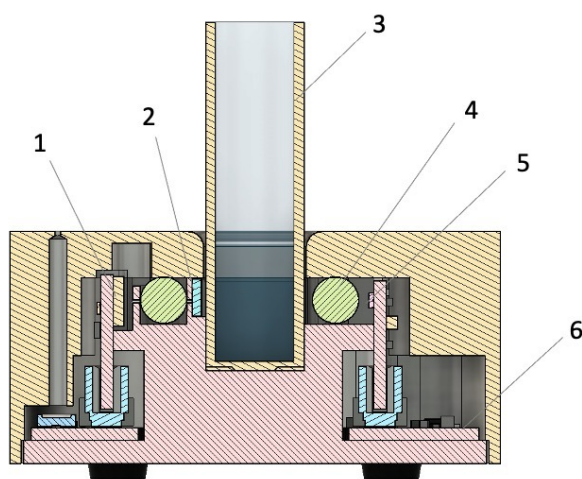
Cross section of the reader with inserted cuvette. 1 LED, 2 Filter, 3 Cuvette, 4 Ball lens, 5 Photodiode, 6 PCB Board.
